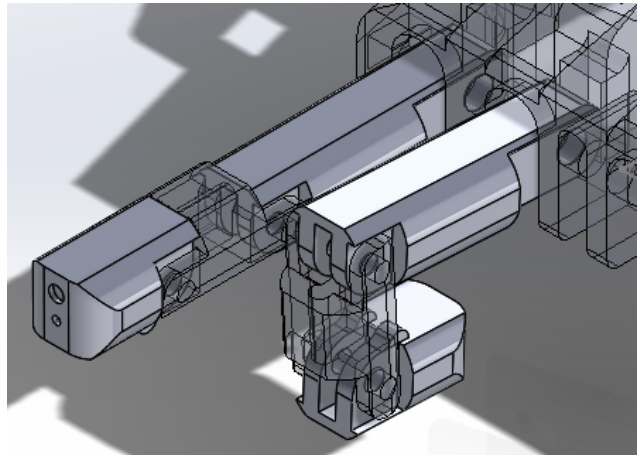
Gen 3.2 Finger; Assembly; Isometric View
